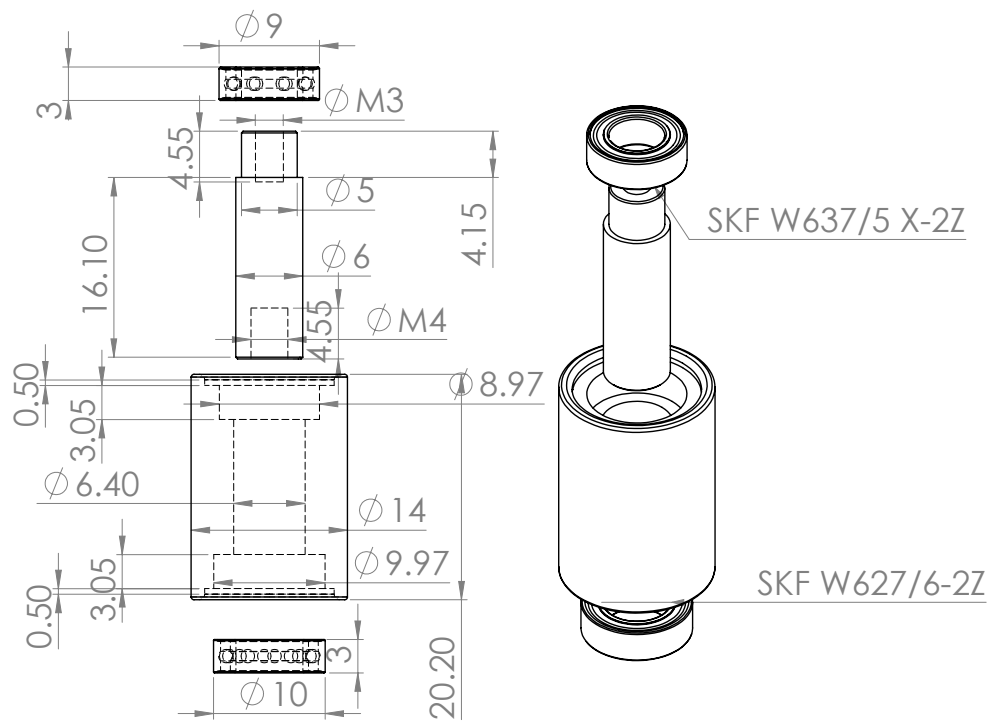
Technical drawing of the roller assembly (mm). Preliminary prototype.
